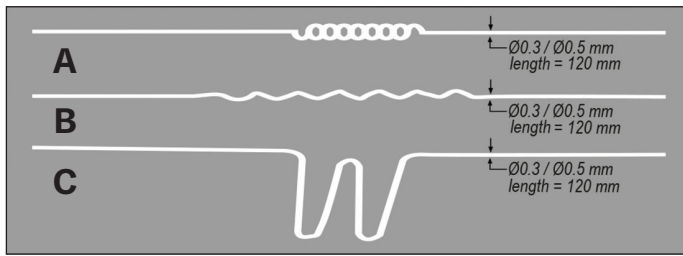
Shapes of joining materials: A – Spiral; B – wavy; C – M-shaped.
